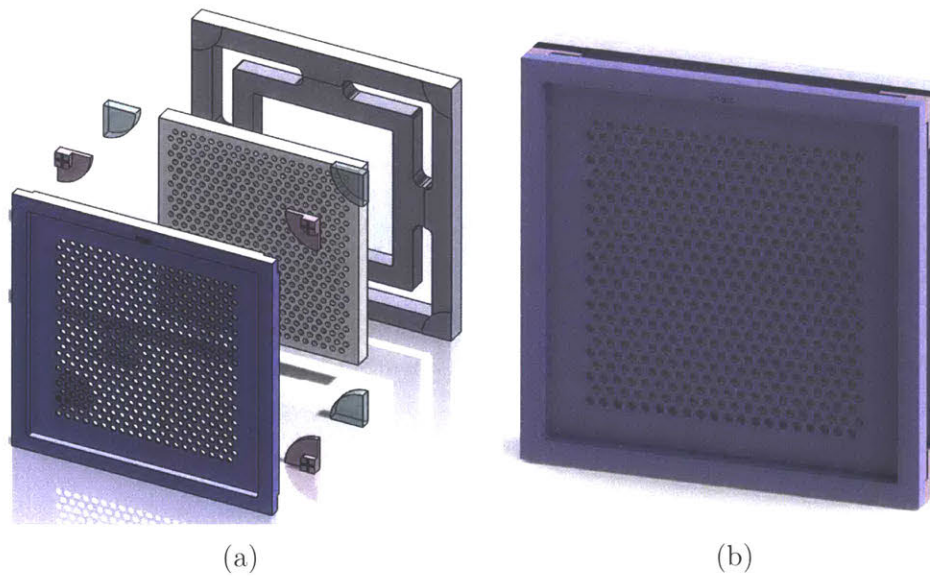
CAD drawings of present iEPS packaging as designed by Louis Perna [10].
